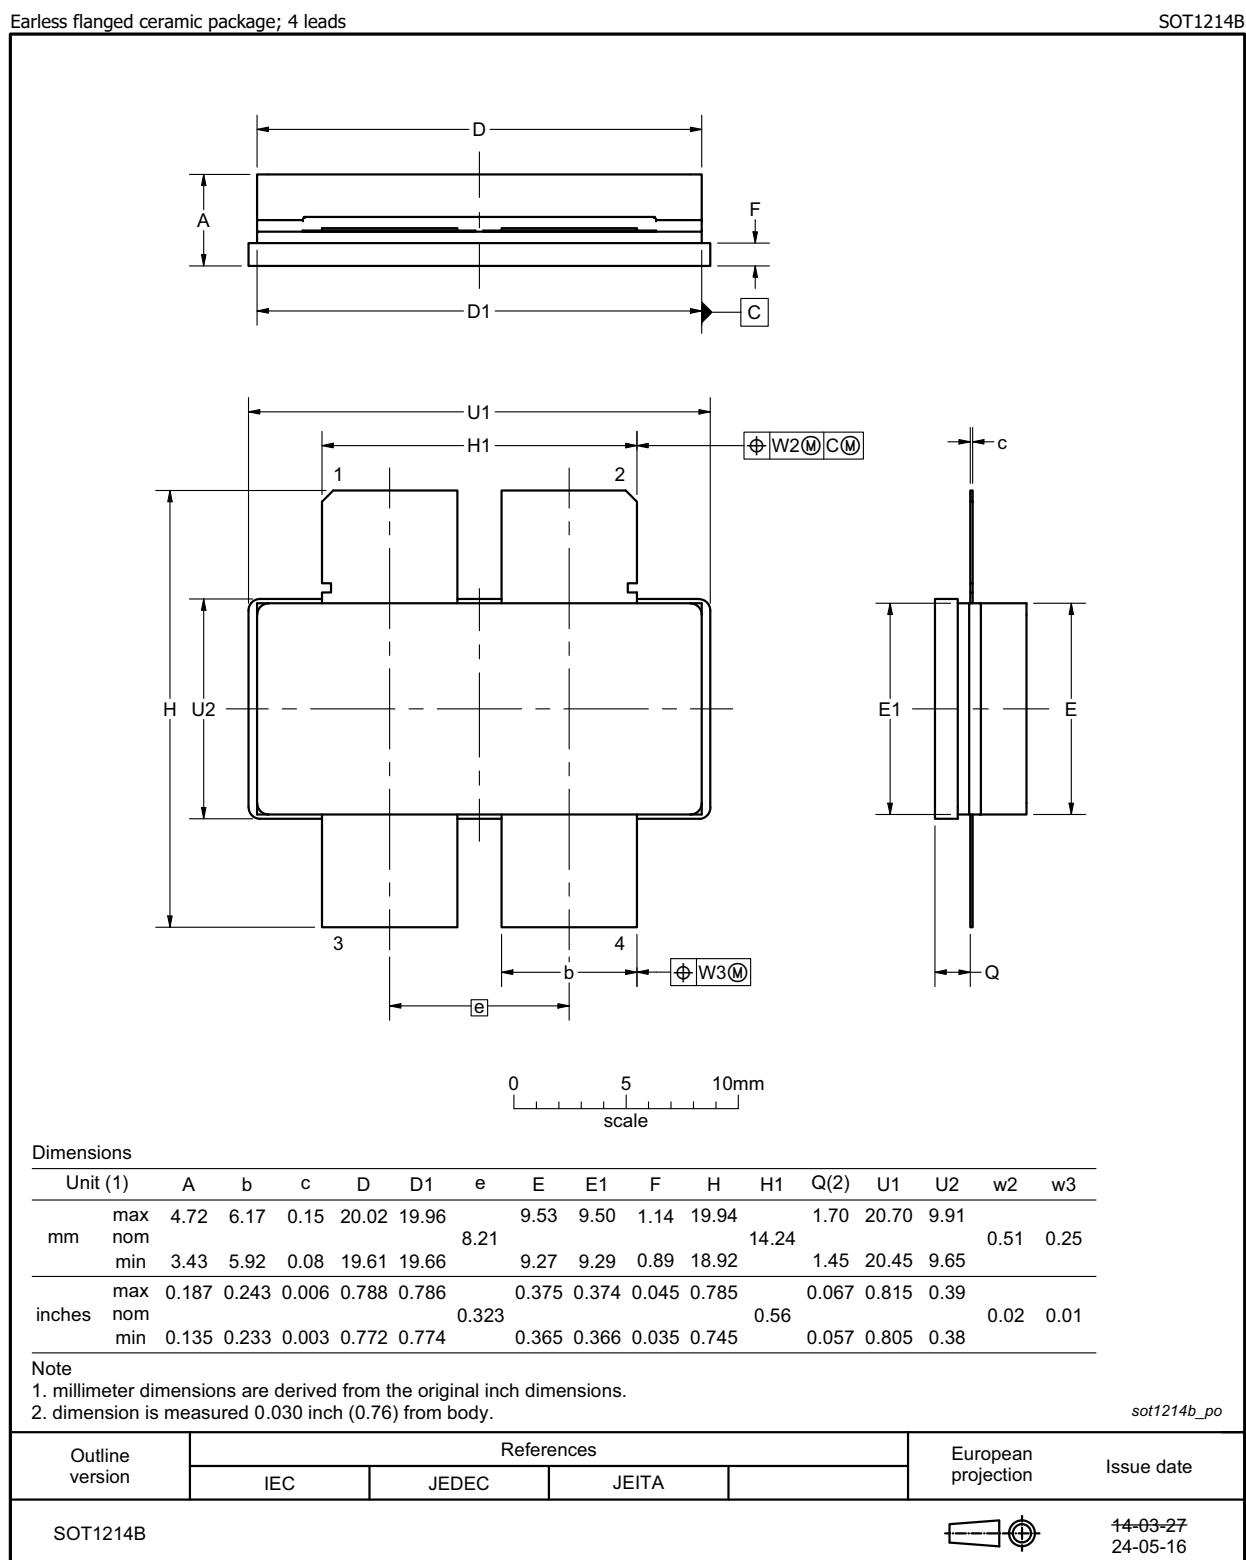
Package outline SOT1214B (sheet 1 of 2)
